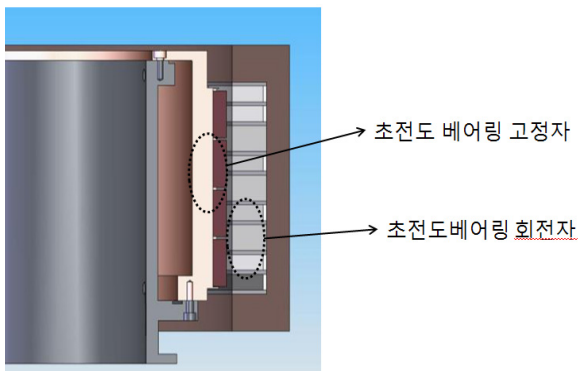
Design of superconductor journal bearing for 100kWh SFES.
